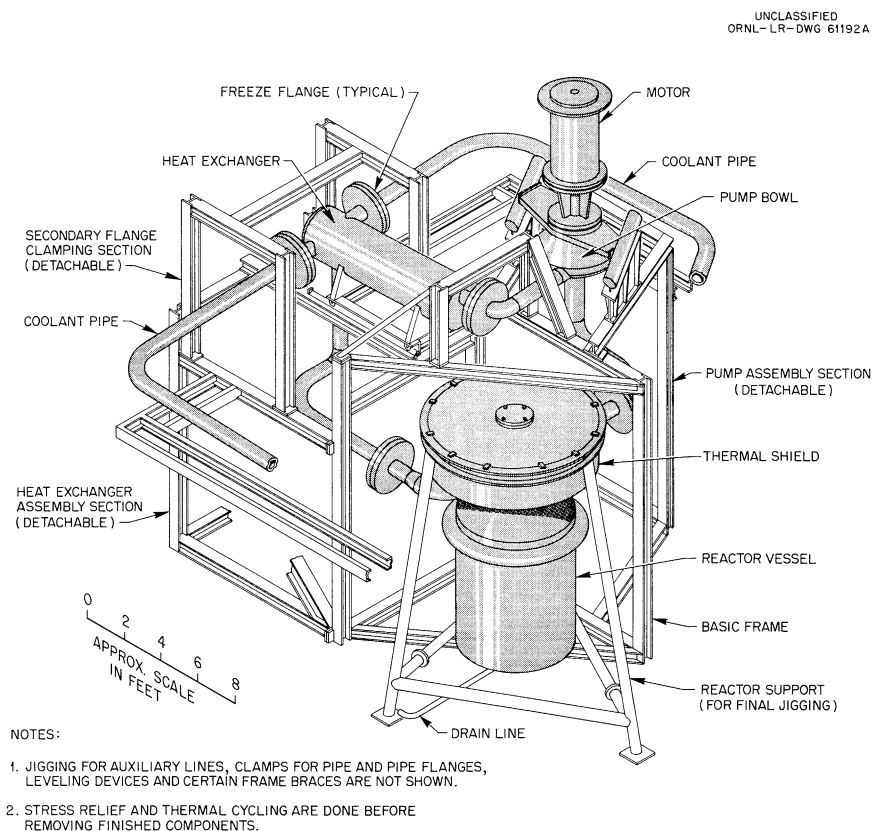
Concept of Fabrication Jig for Primary System.
